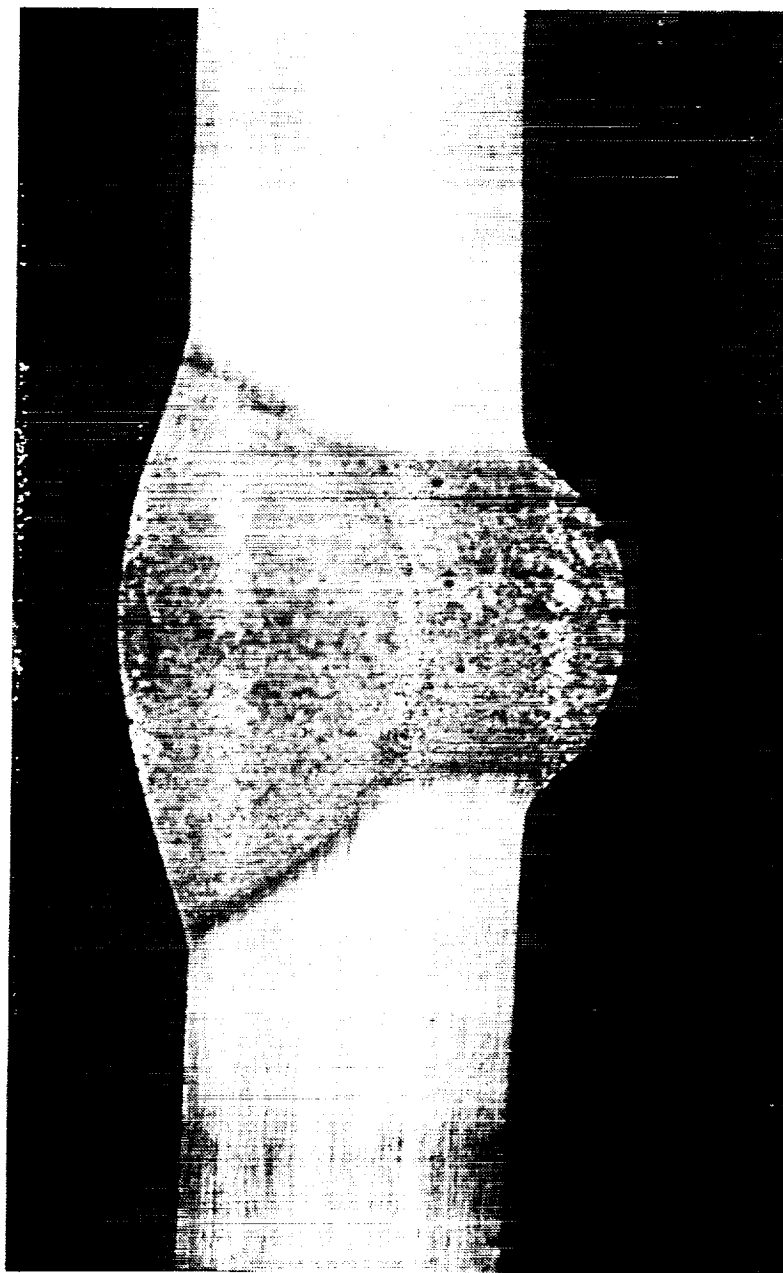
Macro Cross-section of a Double Pass VPPA Weld of 2090-T83, (0.155 inch thickness sheet), some porosity was apparent.
